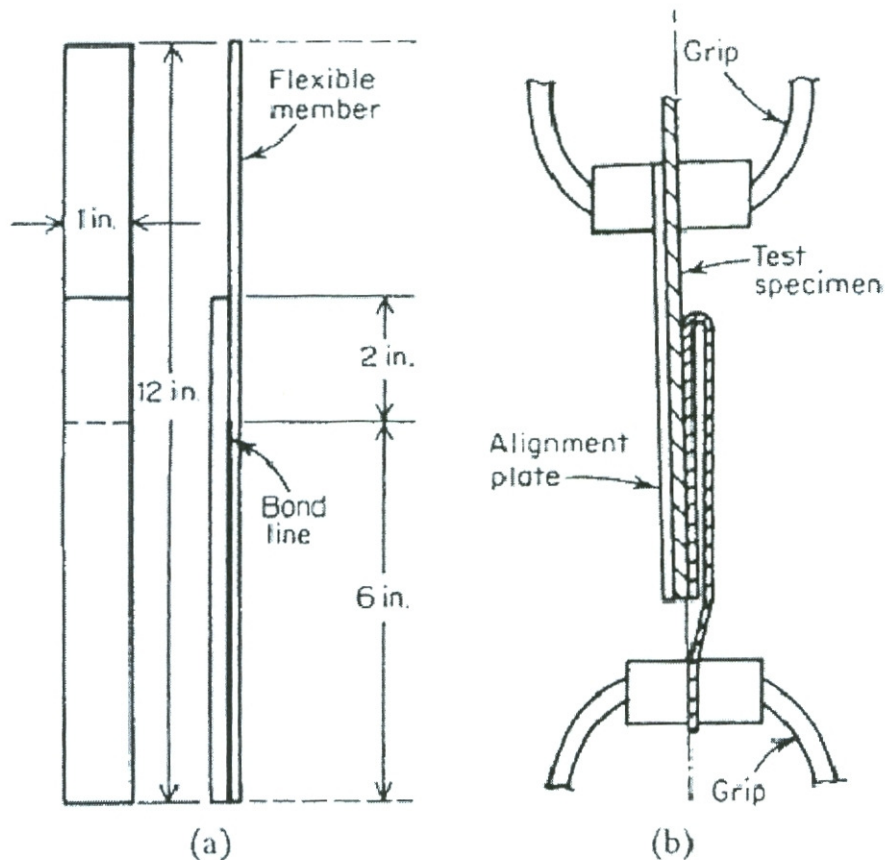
180° peel test specimens: (a) specimen design, (b) specimen under test. [From ASTM D 903]
